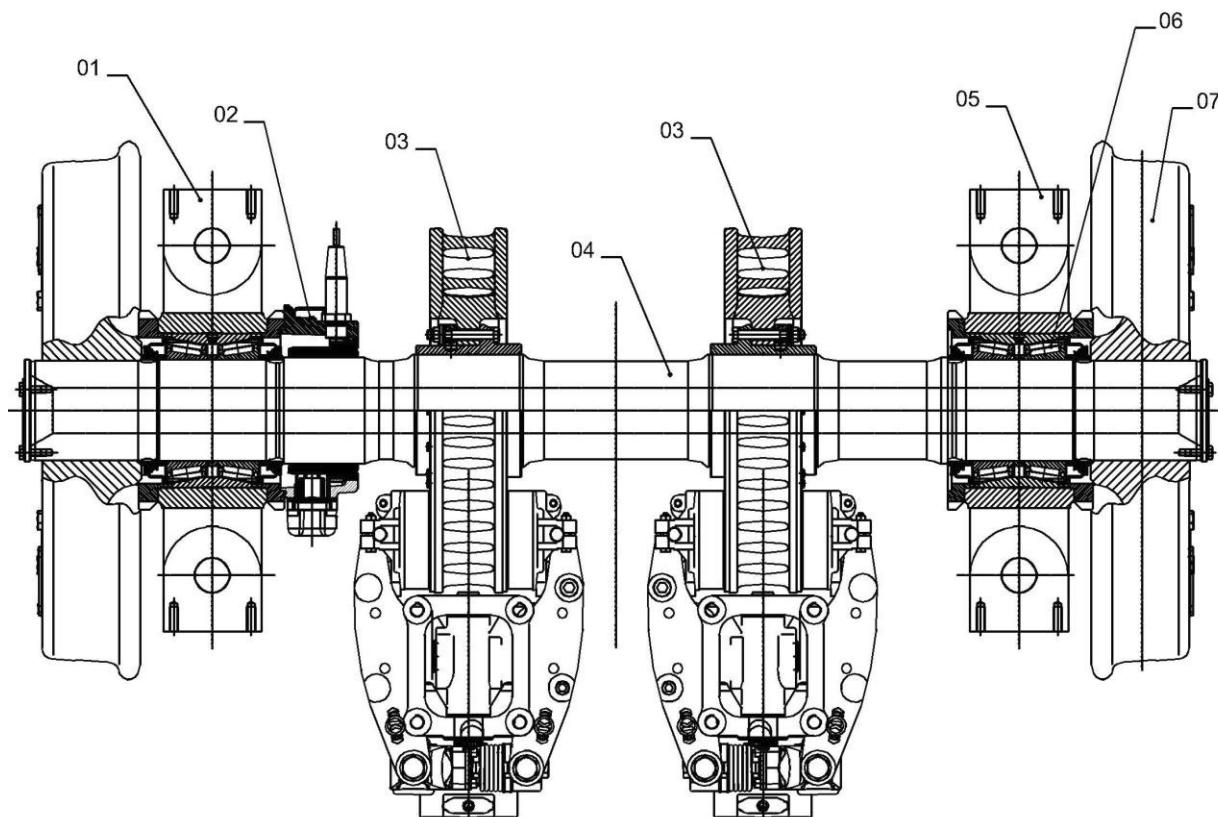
I-02.33 Trailer Truck Wheel Set Assembly
